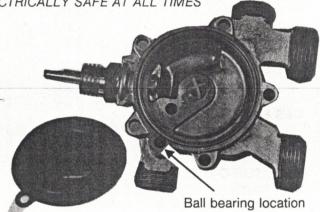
BALL BEARING, DIAPHRAGM AND WATER SECTION
